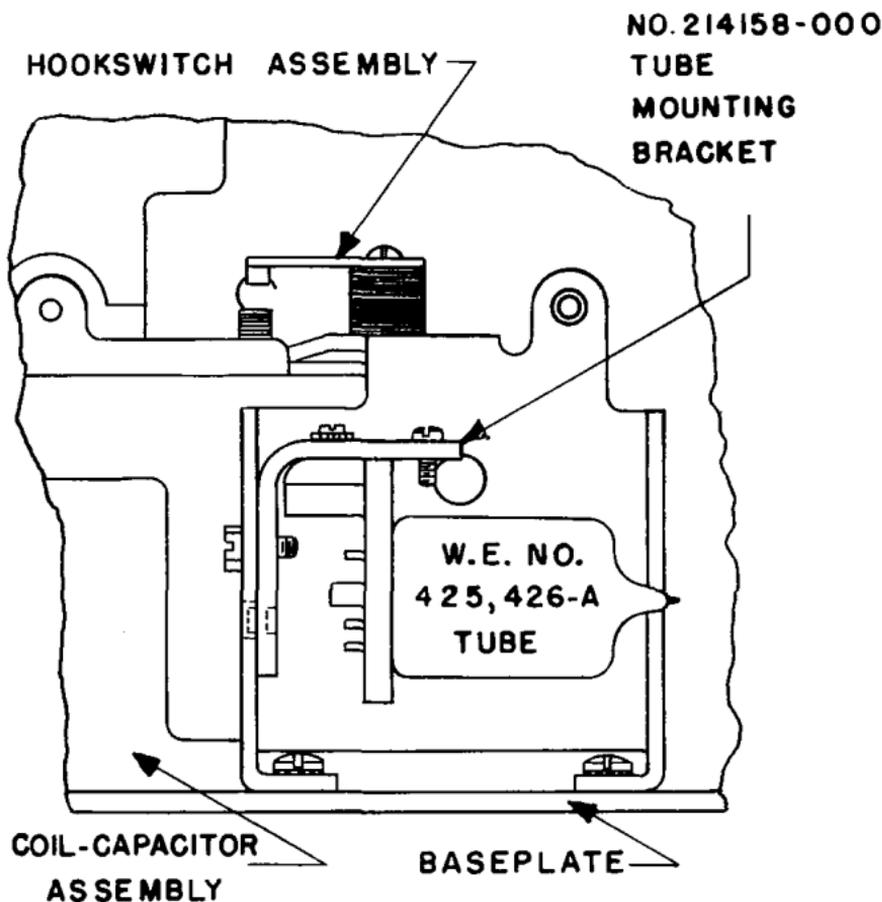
Installation of S.C. No. 214158-000 Tube Mounting Bracket.
